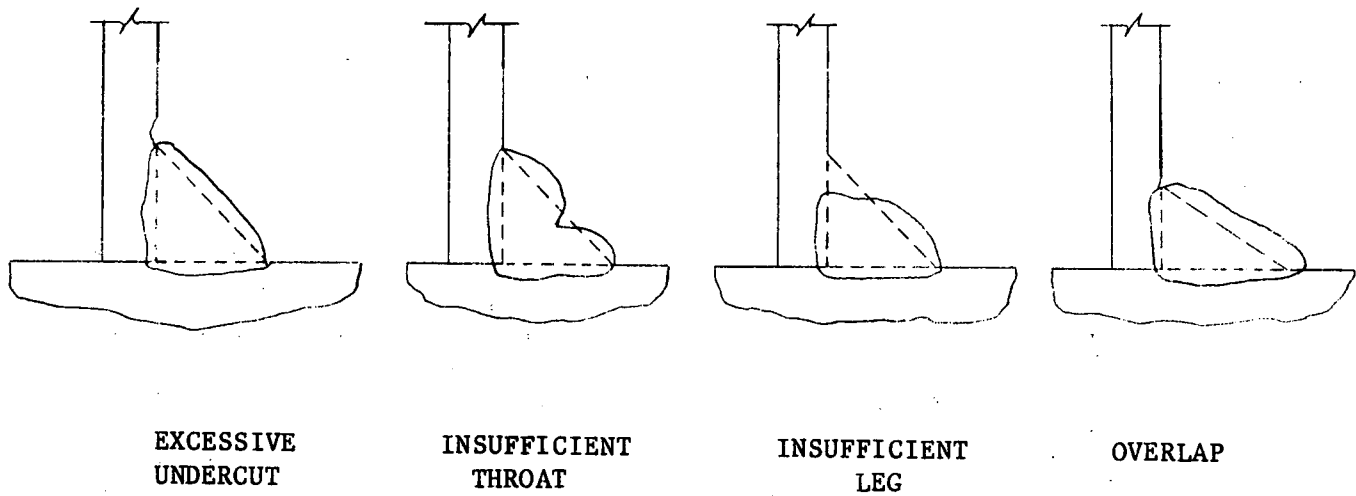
Unacceptable Fillet Weld Profiles
